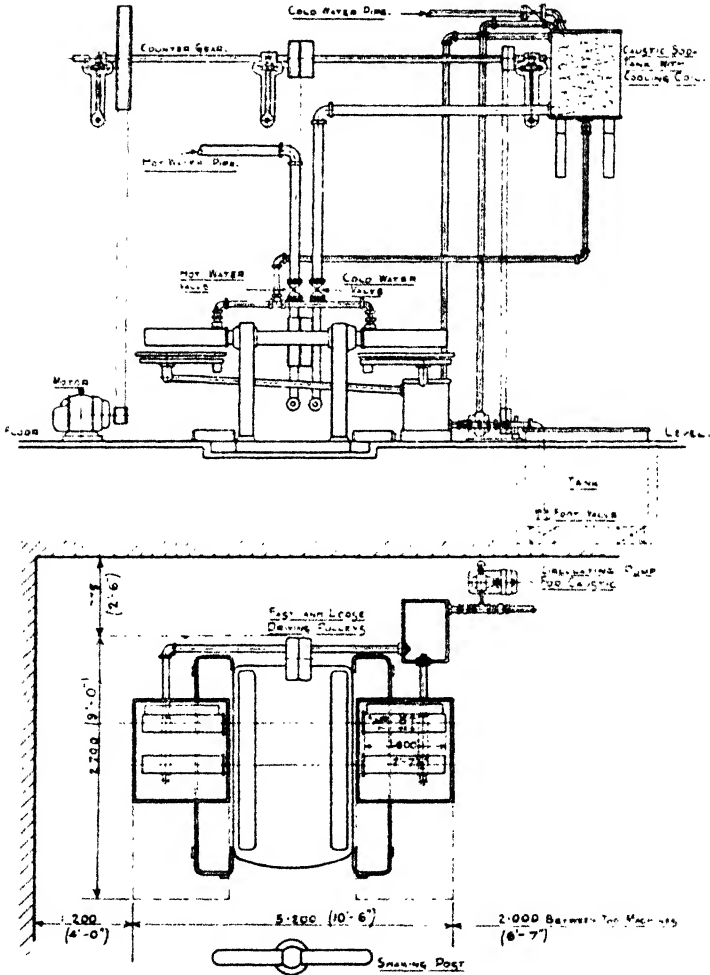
Layout of the "Bonnet" machine. (Mather & Platt Ltd.)
